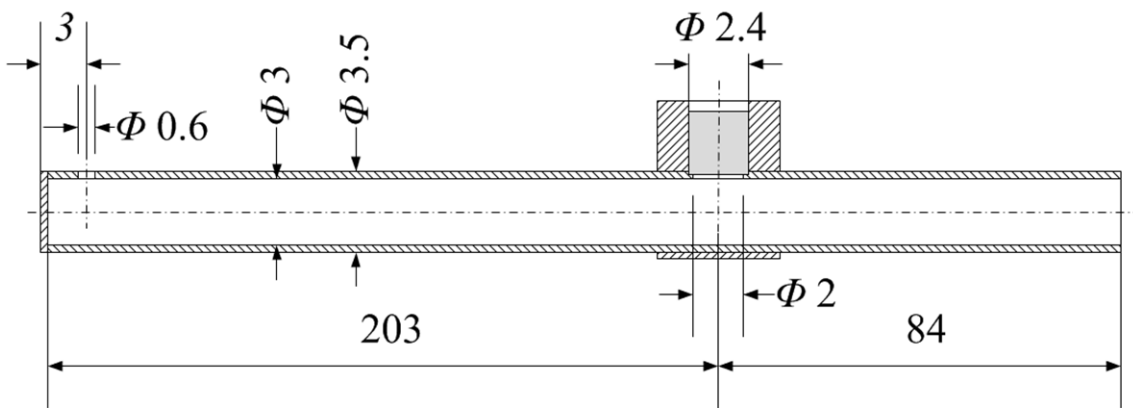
Sketch of the modified waveguide probe (dimensions in millimeters)
